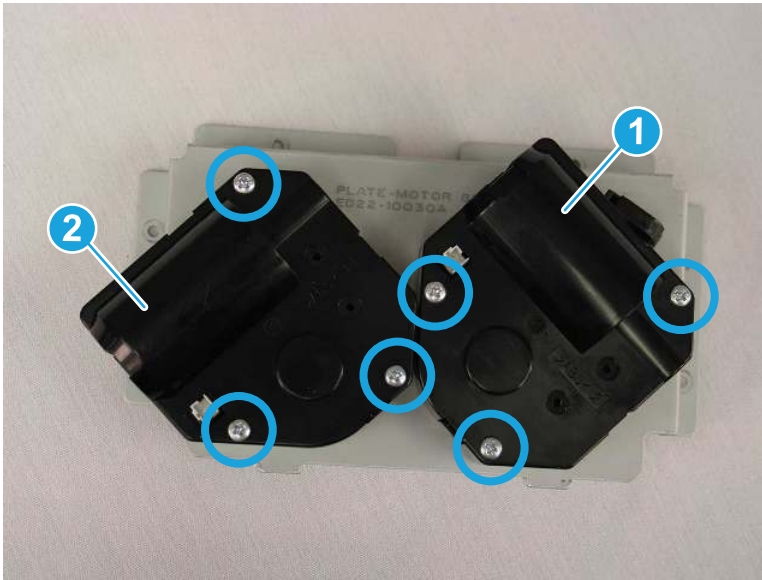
Remove the HCI motor - lift drive right and motor - lift drive left
